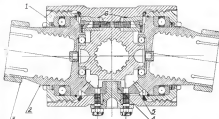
Section of components in former forged 120 design. Parts are: (1) Nut, (2) flange, (3) counterweight shap, (4) synchronizer shaft, (5) synchronizer, and (6) pitch setting stop, fluting regular track.
